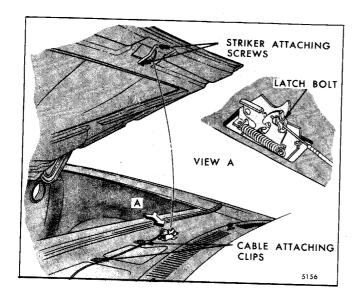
Hood Latch and Hood Latch Striker - H-15 and 77 Styles
